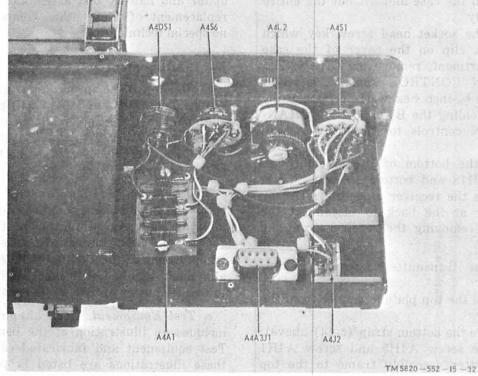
Parts locations, top plate assembly A4, receiver side.
